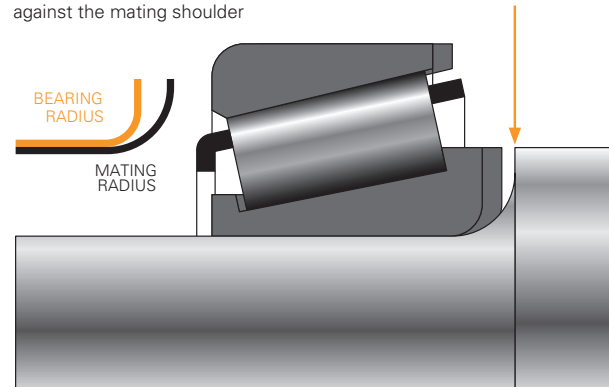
Incorrect bearing radius – bearing inner ring cannot seat fully against the mating shoulder
